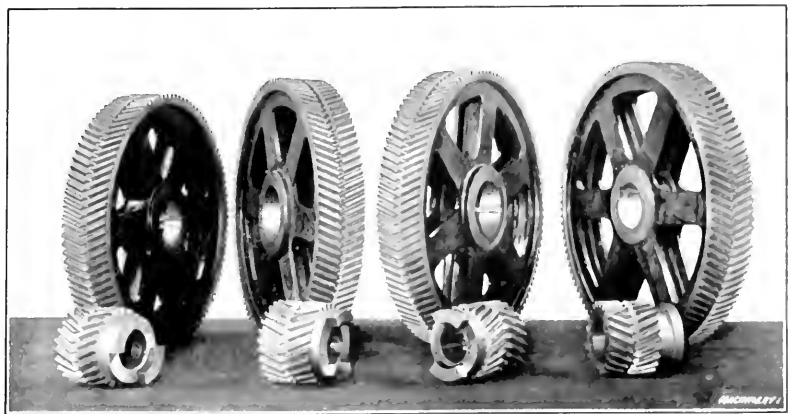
Group of Wuest Herringbone Gears for Rubber Mills
